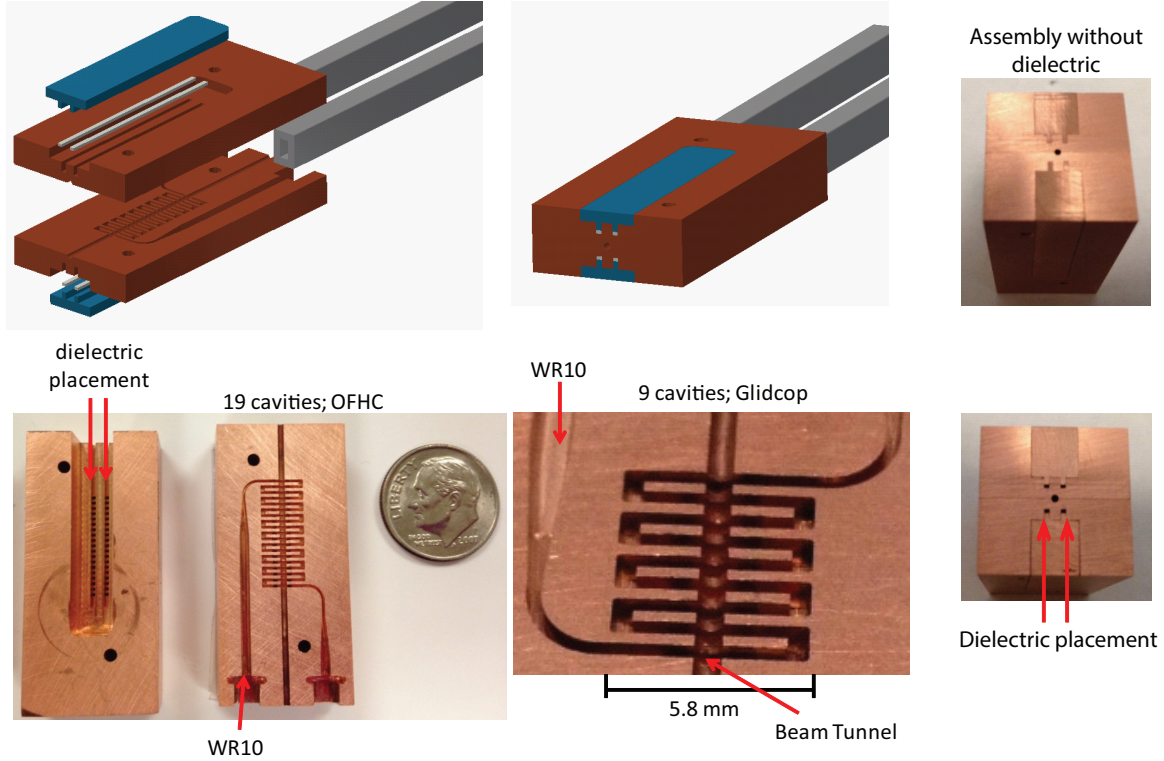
CAD drawings and machined 9 and 19 cavity cold test structures which were made out of OFHC copper and LOX glidcop. Slots were machined into the top of the cavities which could be filled with a copper insert or with dielectric loading.
